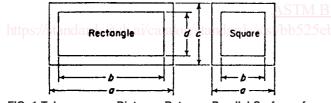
Tolerances on Distance Between Parallel Surfaces for Copper Rectangular and Square Tube (Table 7)
